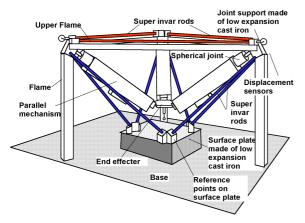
Measurement device for frame deformation in 3D coordinate measuring machine
